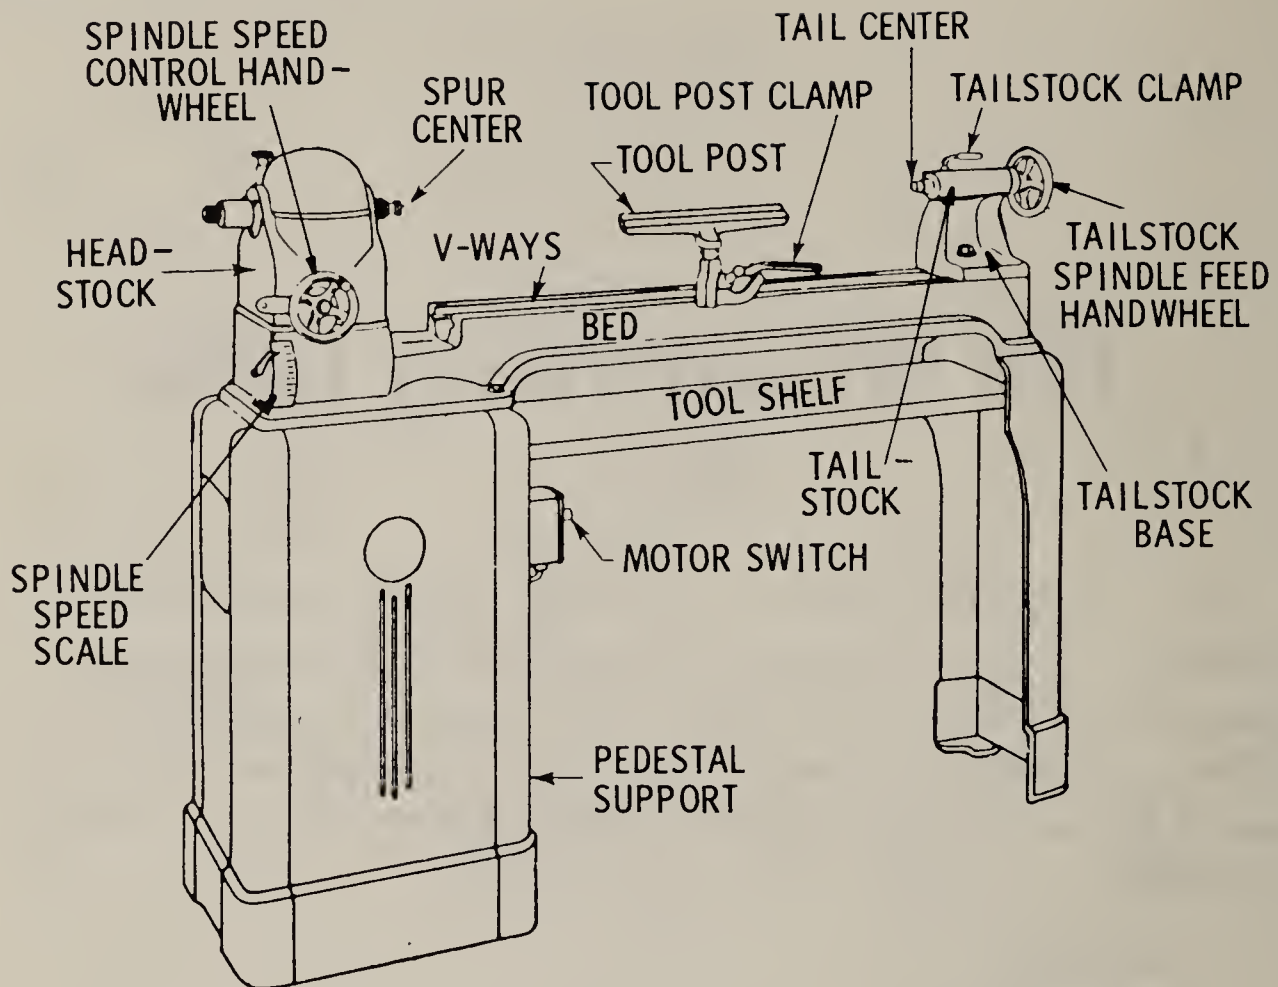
Typical variable-speed woodturning lathe. While built primarily for woodturning, its heavy cast-iron headstock and double rows of preloaded spindle bearings make it an ideal machine for metal spinning as well. The spindle speed may be changed while the machine is running by means of a handwheel located in front of the headstock. Spindle speeds from 300 to 2,600 rpm may be obtained from a 1,750 rpm motor. Speed of the spindle is shown on a graduated scale located beneath the speed-changing handwheel. The variable-speed drive and motor are mounted inside the heavy cast-iron pedestal, where they are protected from dust and chips.
